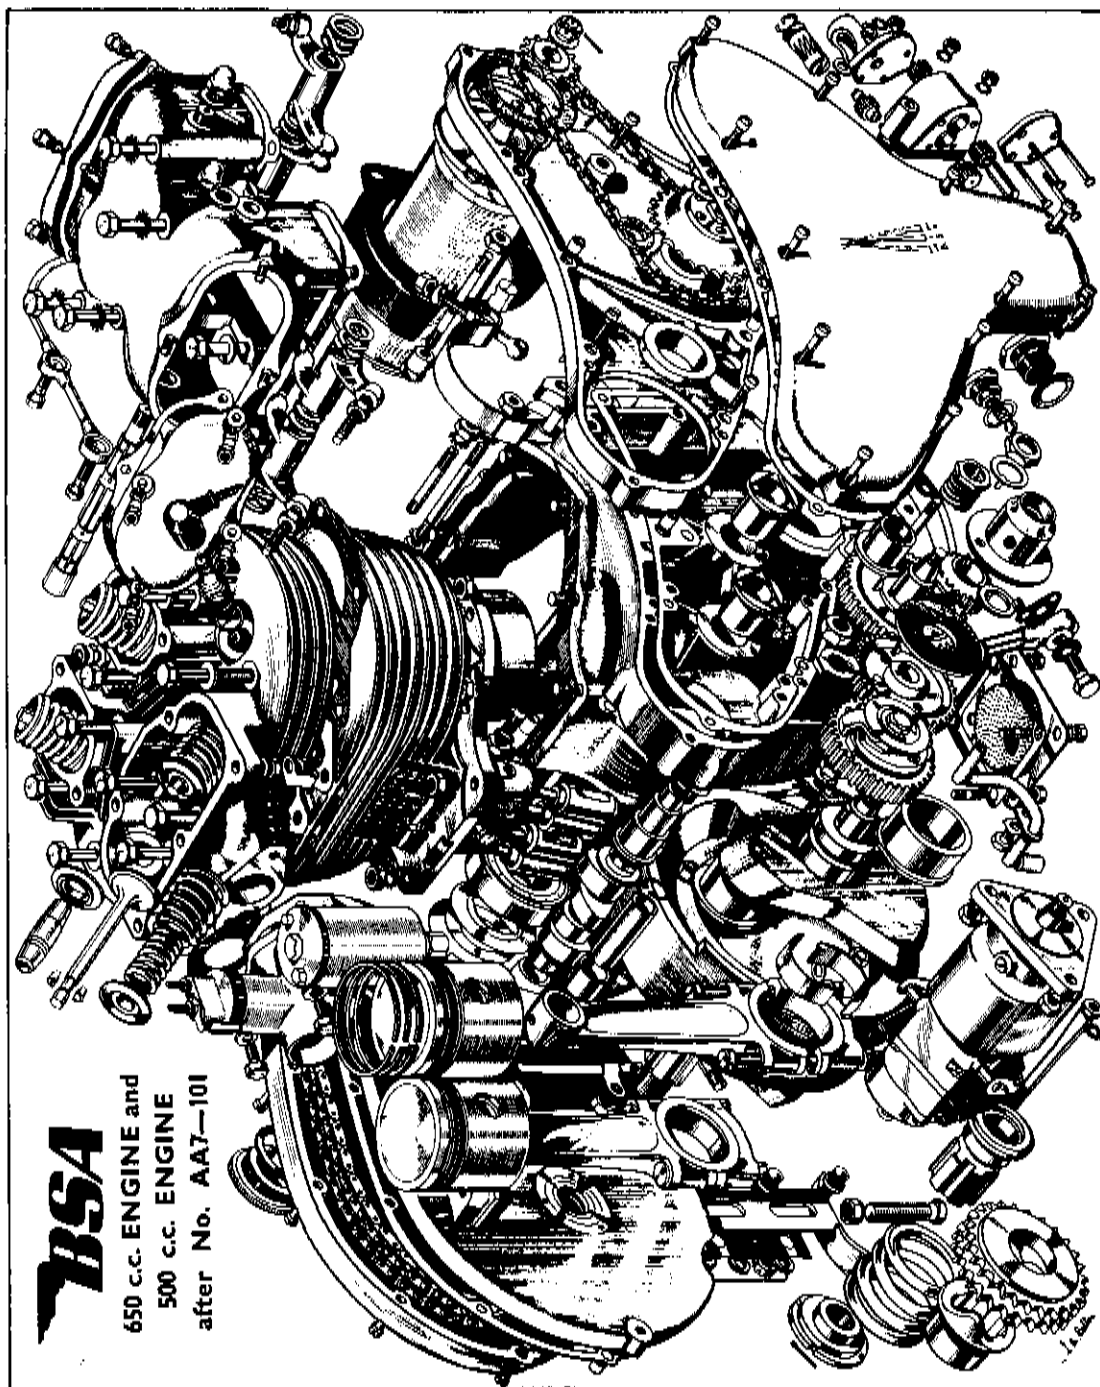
The A7 Engine and Gearbox (Exploded View)
